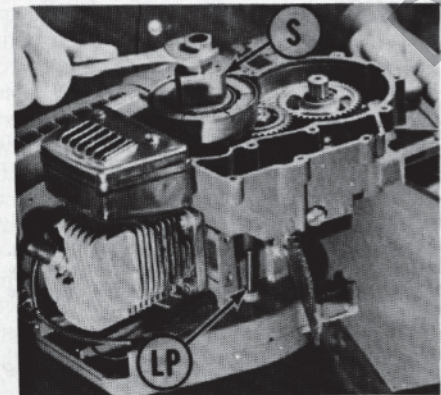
When removing clutch spider, use lock pin (LP) inserted as shown and turn clutch spider clockwise using a spanner wrench (S). Homelite number for spanner is A-23969.
